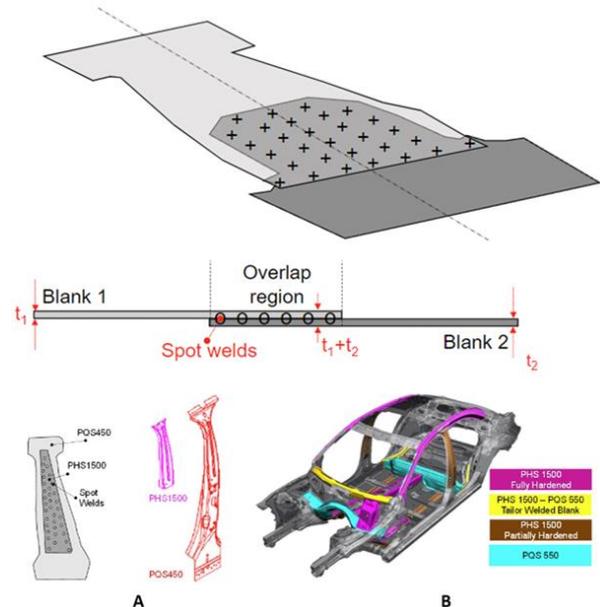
Overlapped patch sheet welding (a) and Jaguar I-Pace B-pillar (b) [70,71]
